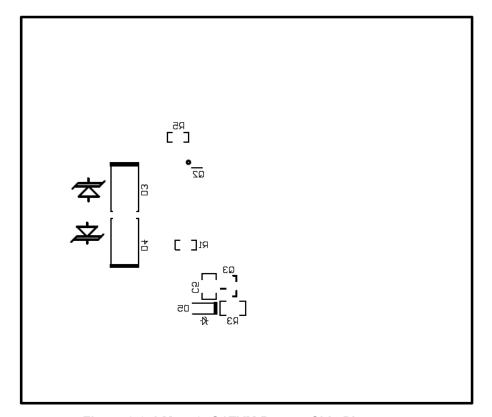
LM74704Q1EVM Bottom Side Placement
